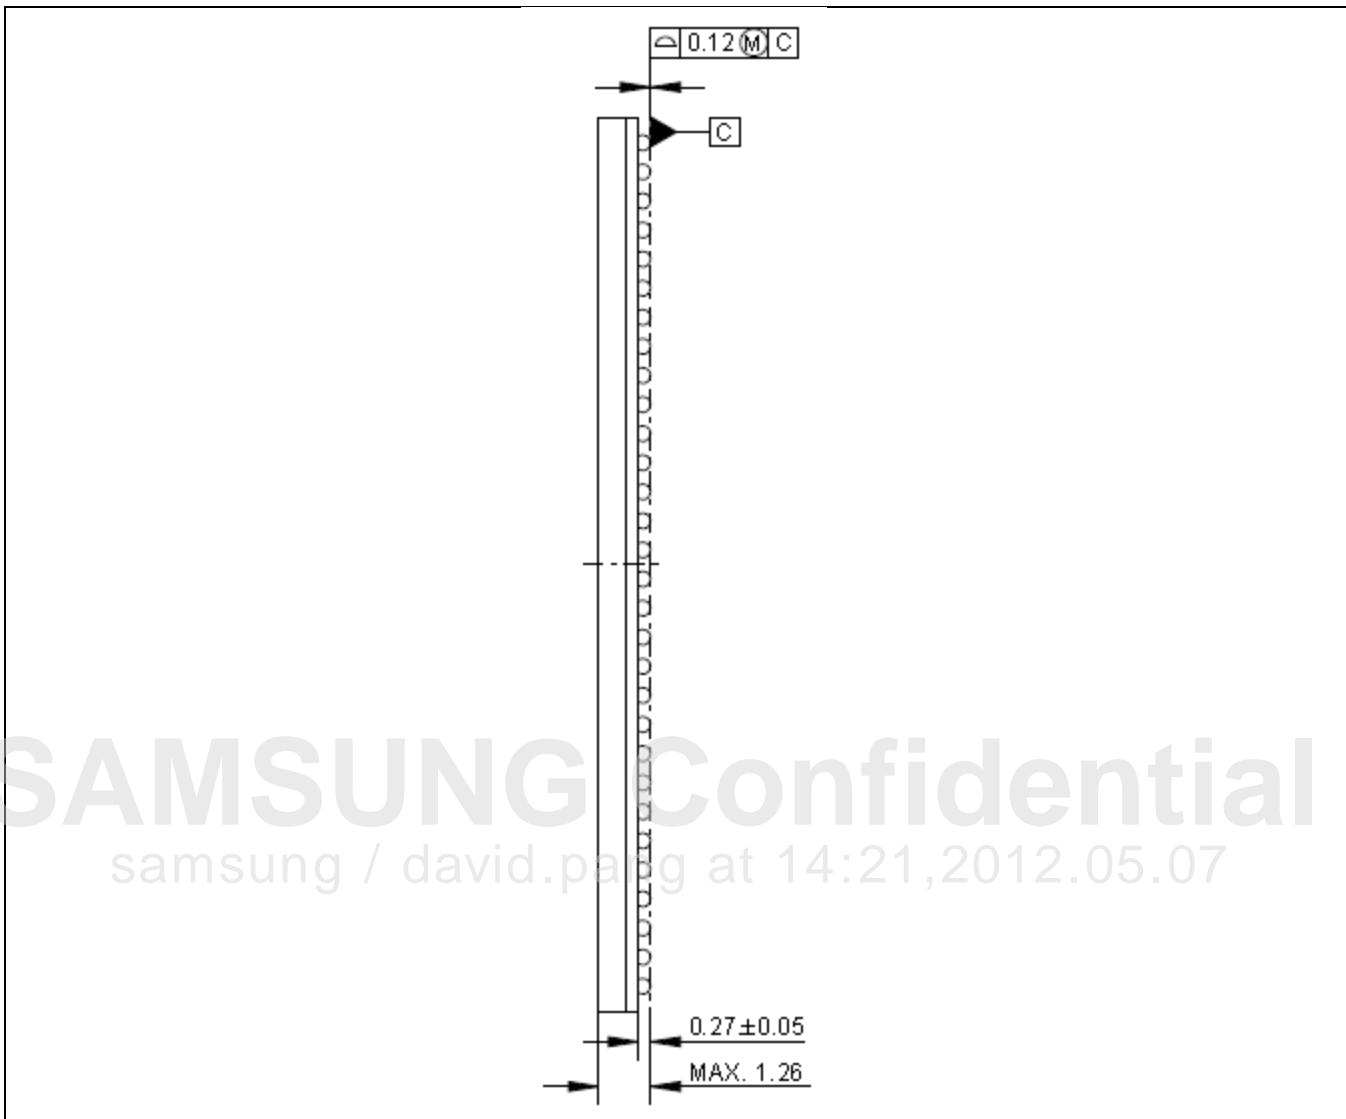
Exynos 4412 SCP Package Dimension (784-FCFBGA) Side View
